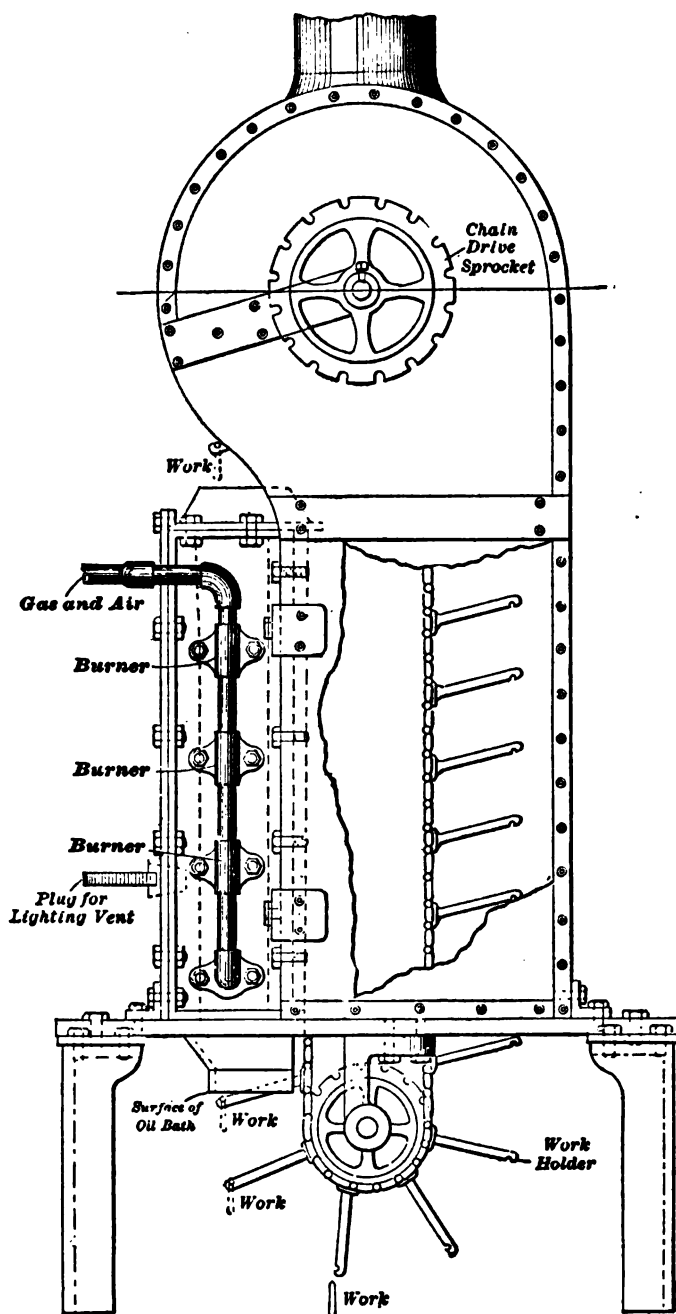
Automatic Hardening Machine for Weige Slides.
